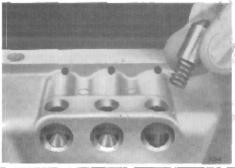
Inserting 1st/2nd speed selector shaft showing interlock plunger at position (a)
